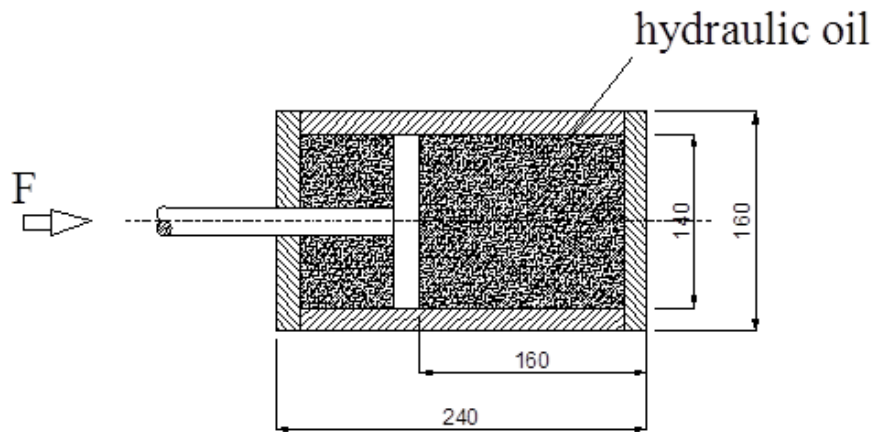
schematic drawing of momentum trap hydraulic cylinder (all dimensions in mm)
